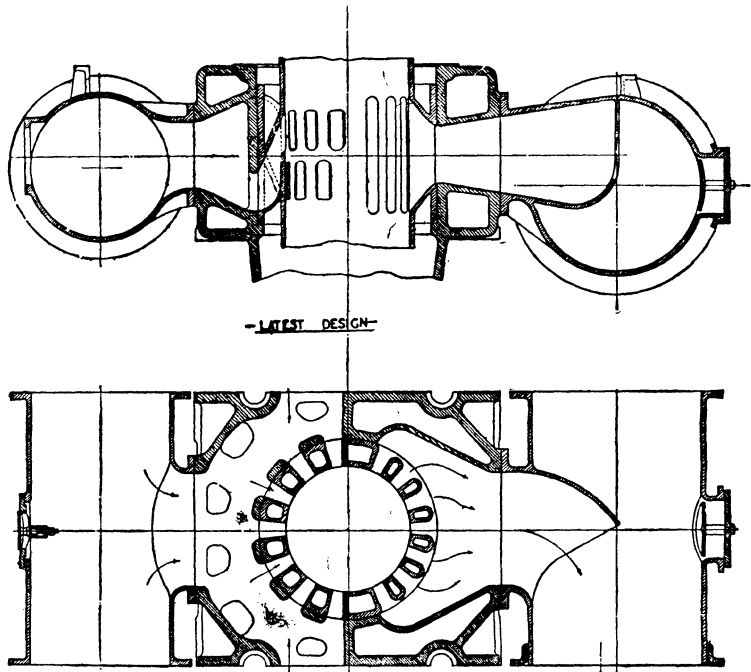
Section through Scavenge-exhaust Belt, R.W. Supercharging
